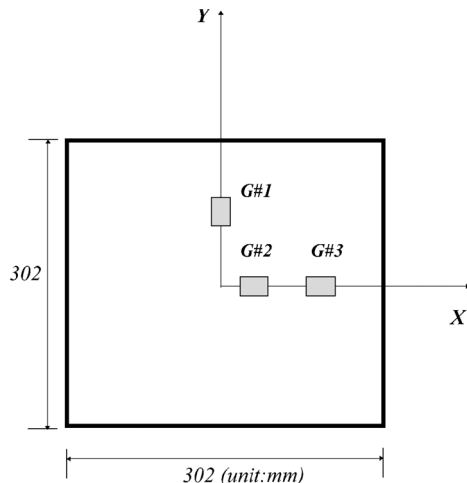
Dimensions and coordinates of the sandwich panel. Three gauges were mounted on the impact side of the face plates; coordinates in millimeters were (30, 0, 7), (80, 0, 7), and (0, 70, 7) for gauges 1, 2, and 3, respectively.
